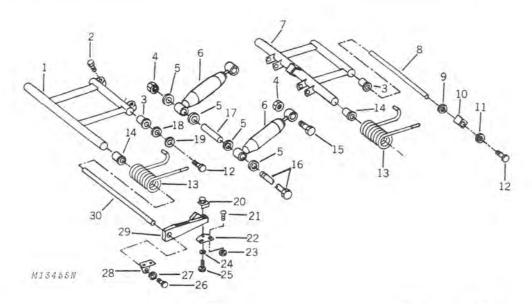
Exploded View of Rear Idler, Track and Slide Rails
